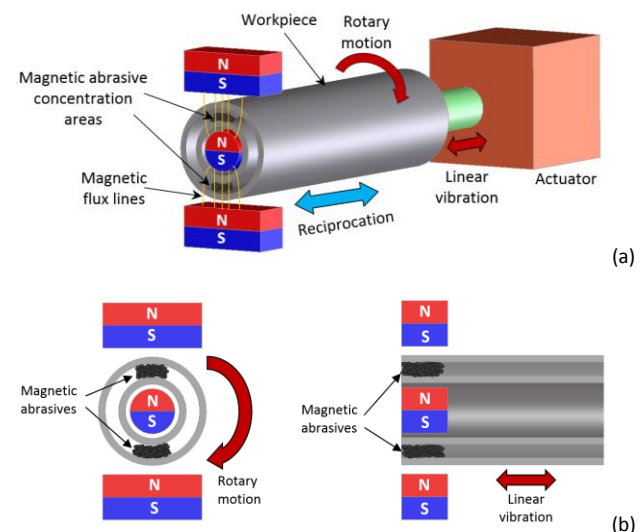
Schematic illustration of the VMAP method. (a) whole view and (b) cross-sectional views.
